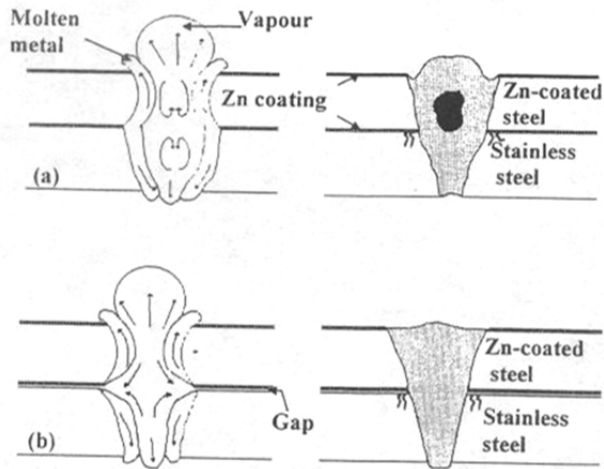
Schematic illustrations showing the effect of introducing a gap between the sheets being welded on weld zone profile, porosity and LME cracking.
